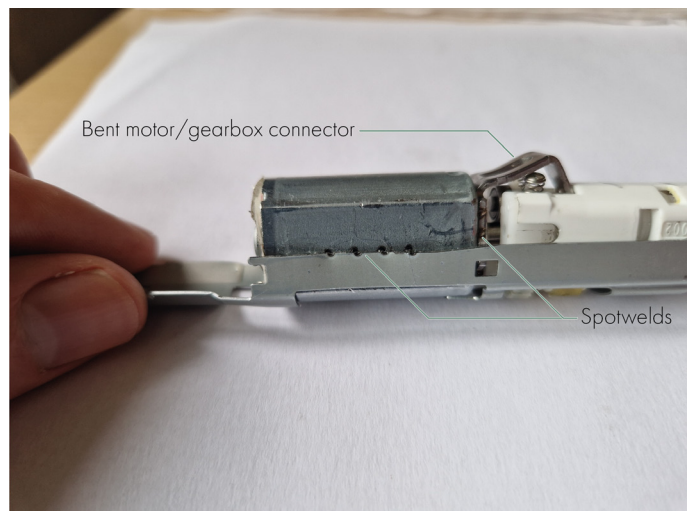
The motor of the Oral-B Professional Care 3000 is welded into place, making it time-consuming to remove.
